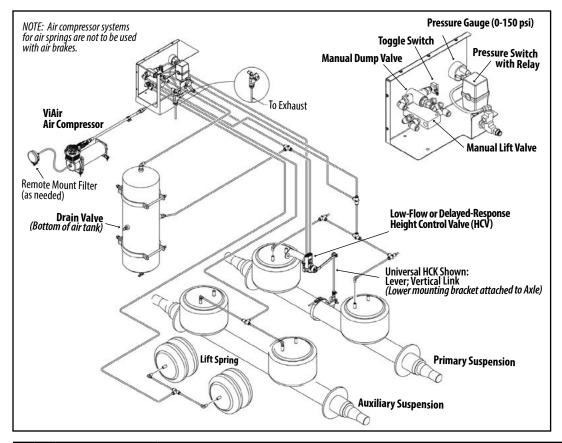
ViAir Panel-Mounted ACK w/ Height Control Kit • ViAir Air Compressor Mounting Panel •
